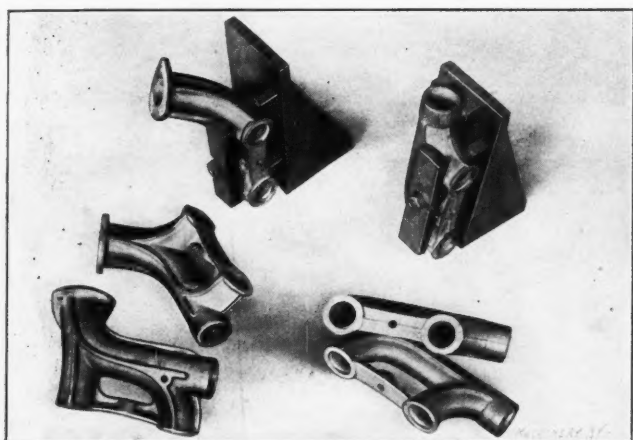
Milling Jigs for Two Different Shapes of Exhaust Manifolds
